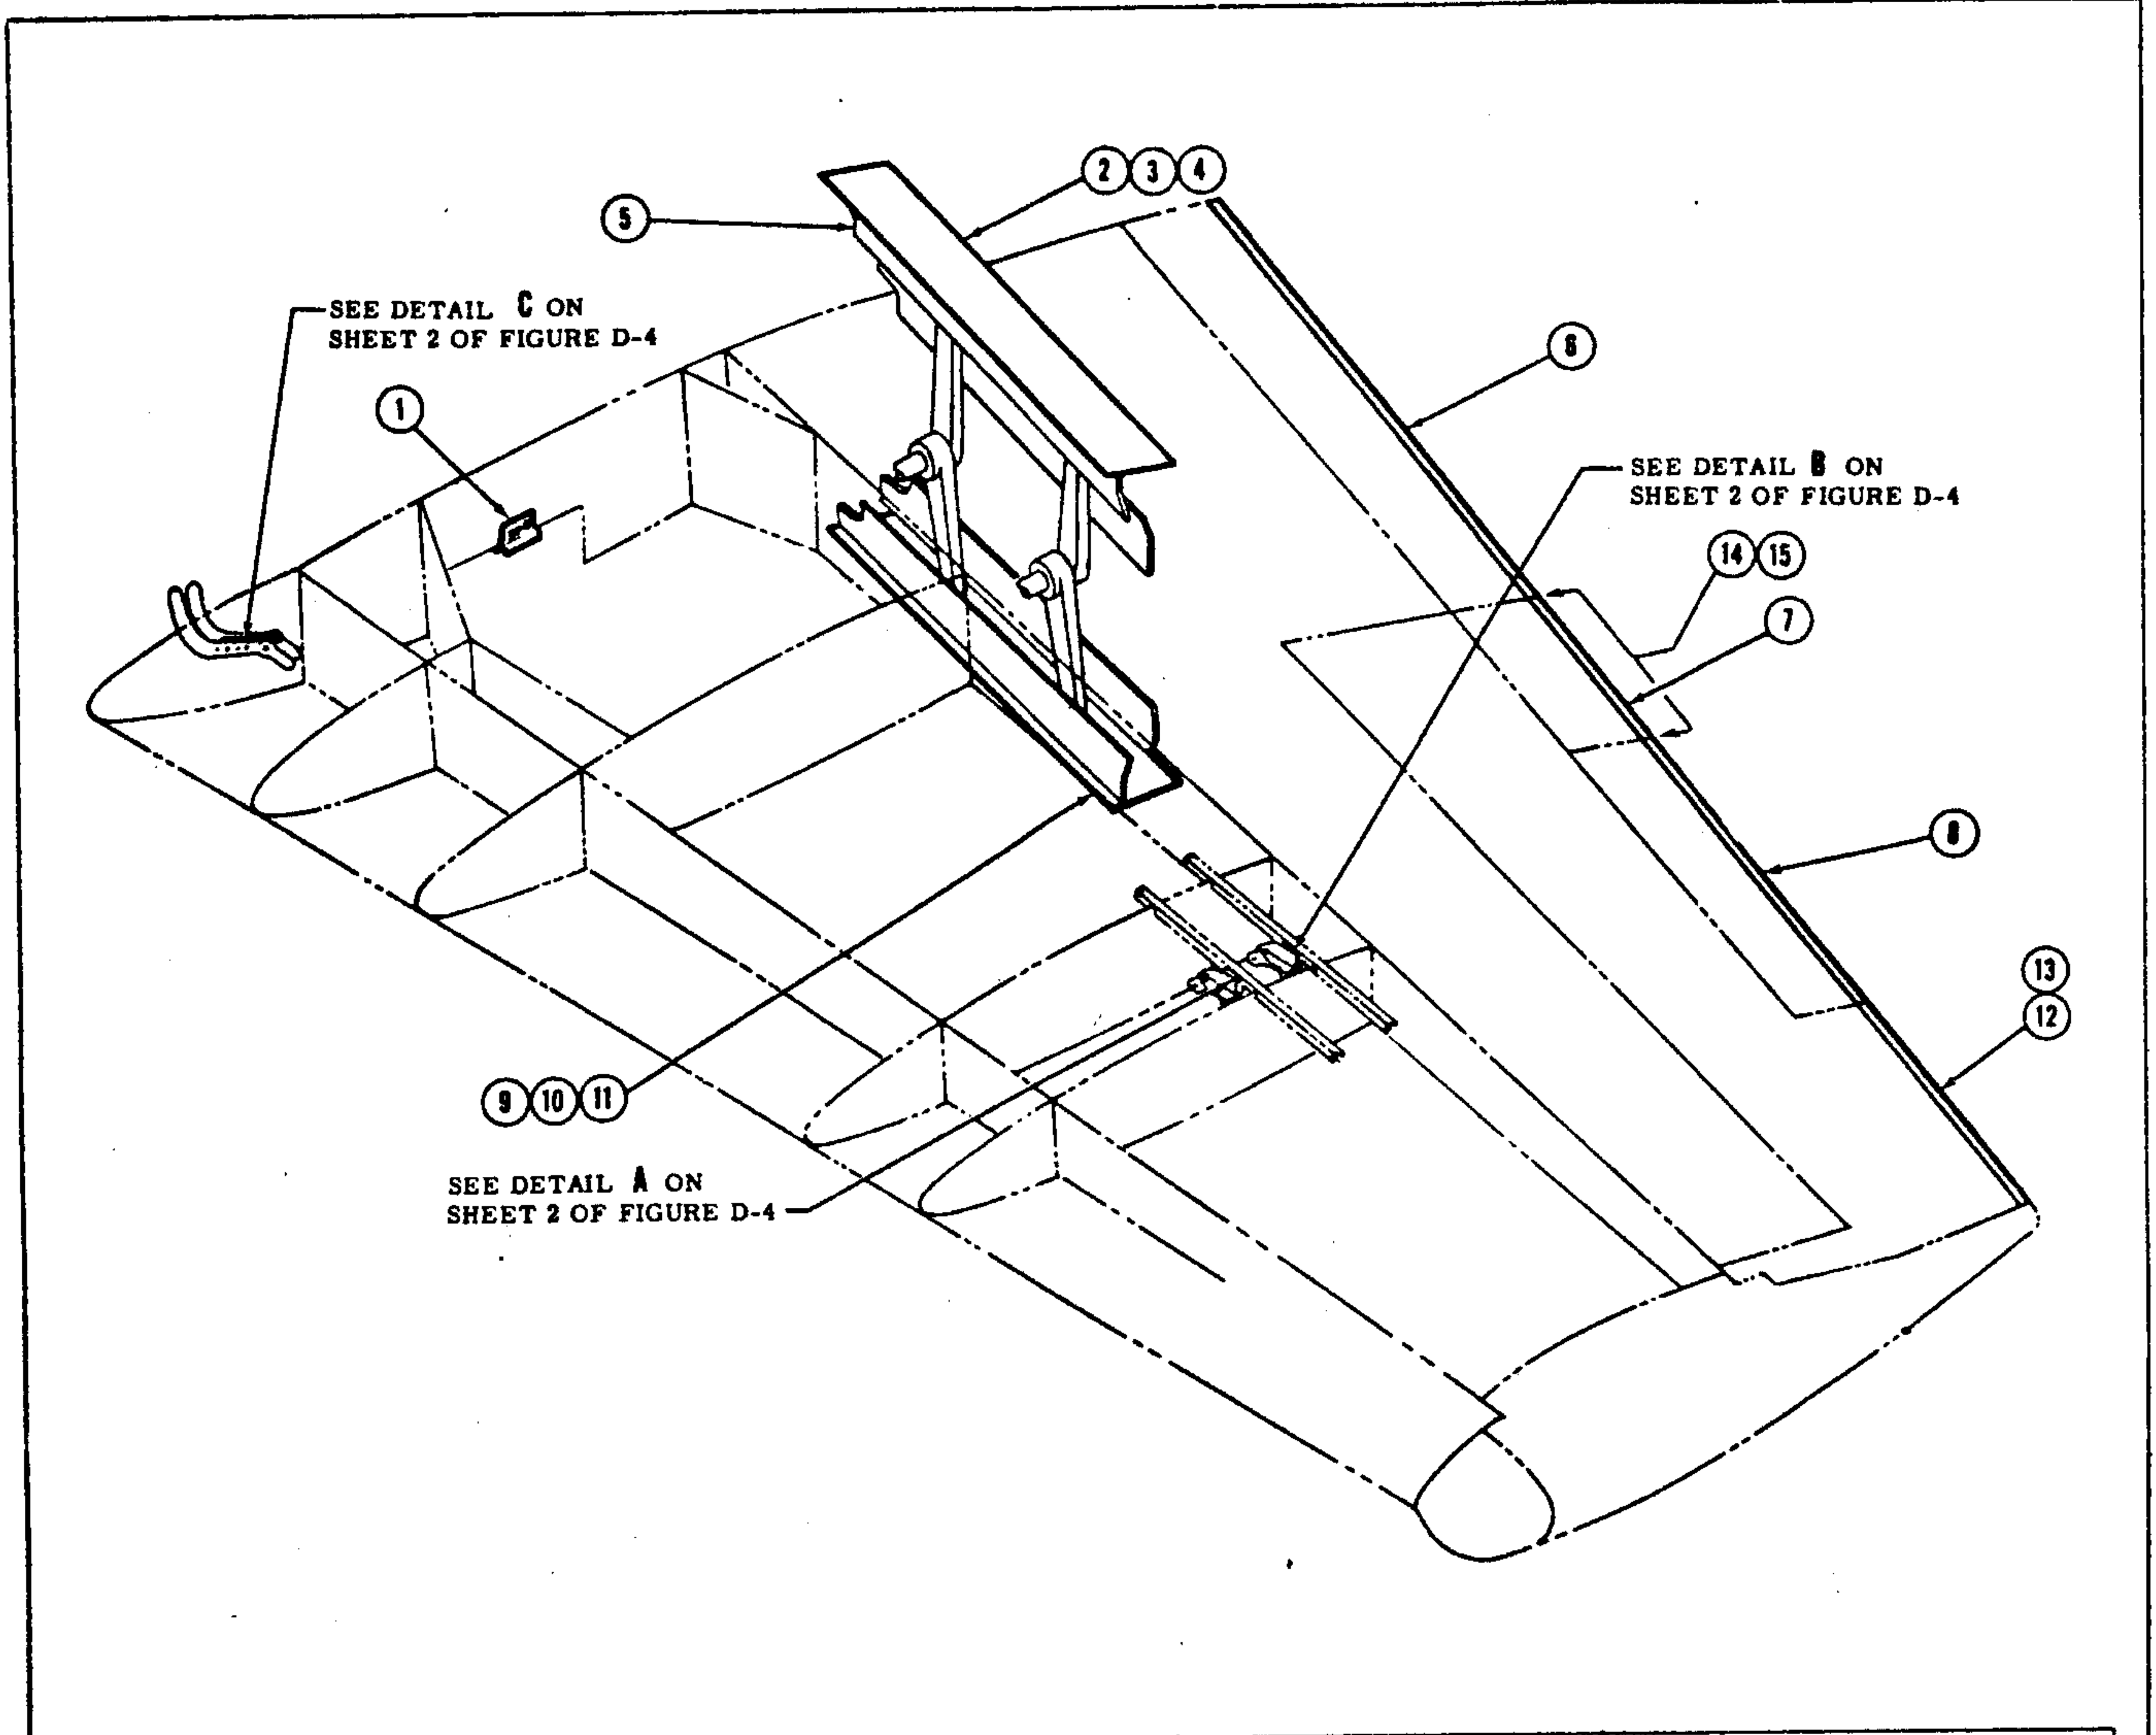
Dissimilar Metals Diagram - Center Section Wing (Sheet 2 of 2 Sheets)
